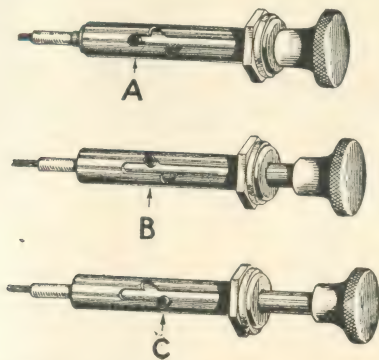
CARBURETTOR AIR CHOKE CONTROL POSITIONS
